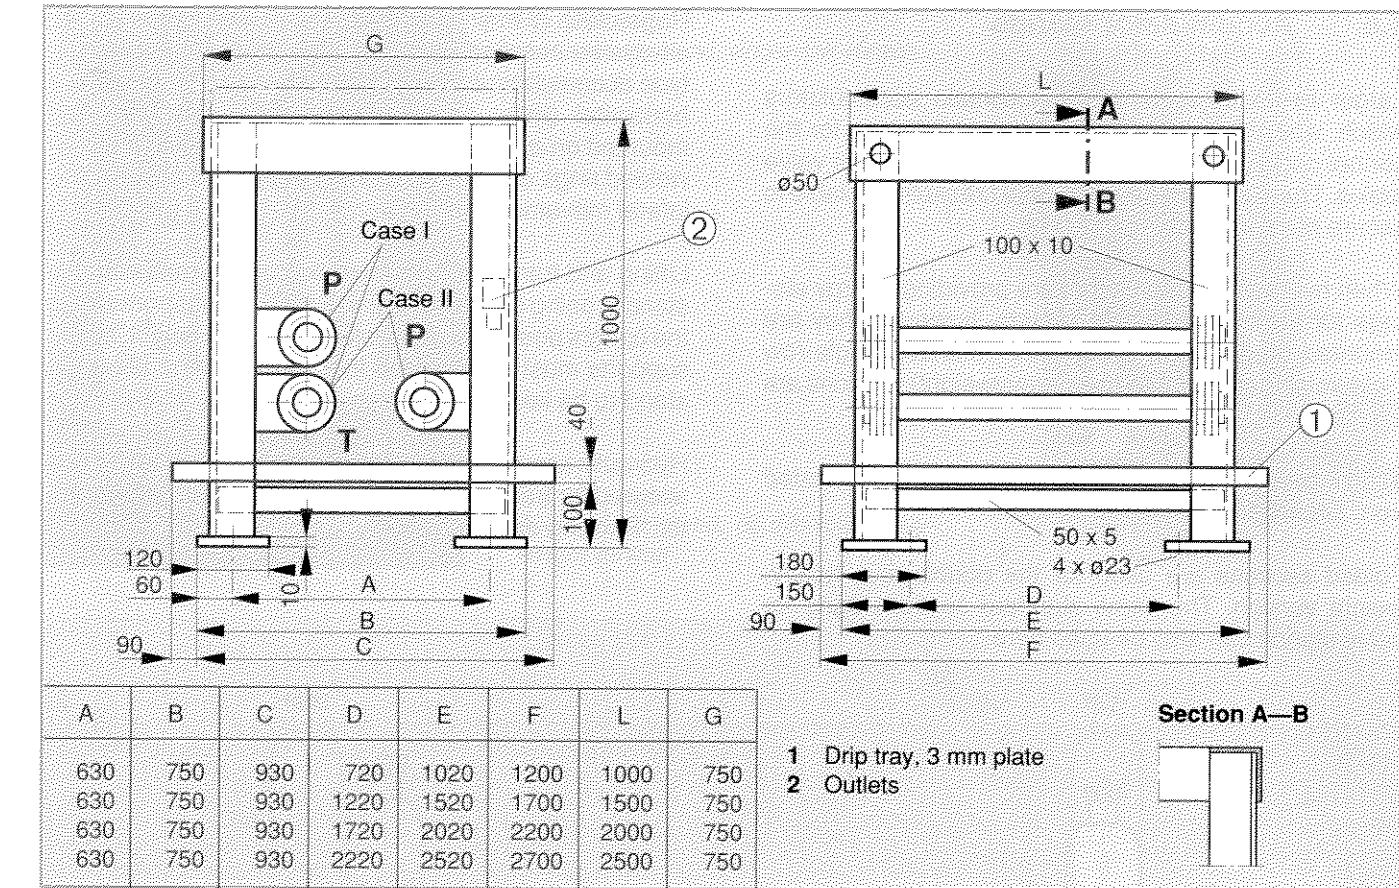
Valve table, lightweight version, for mounting single valves up to Size 22 and control plates up to Size 16
